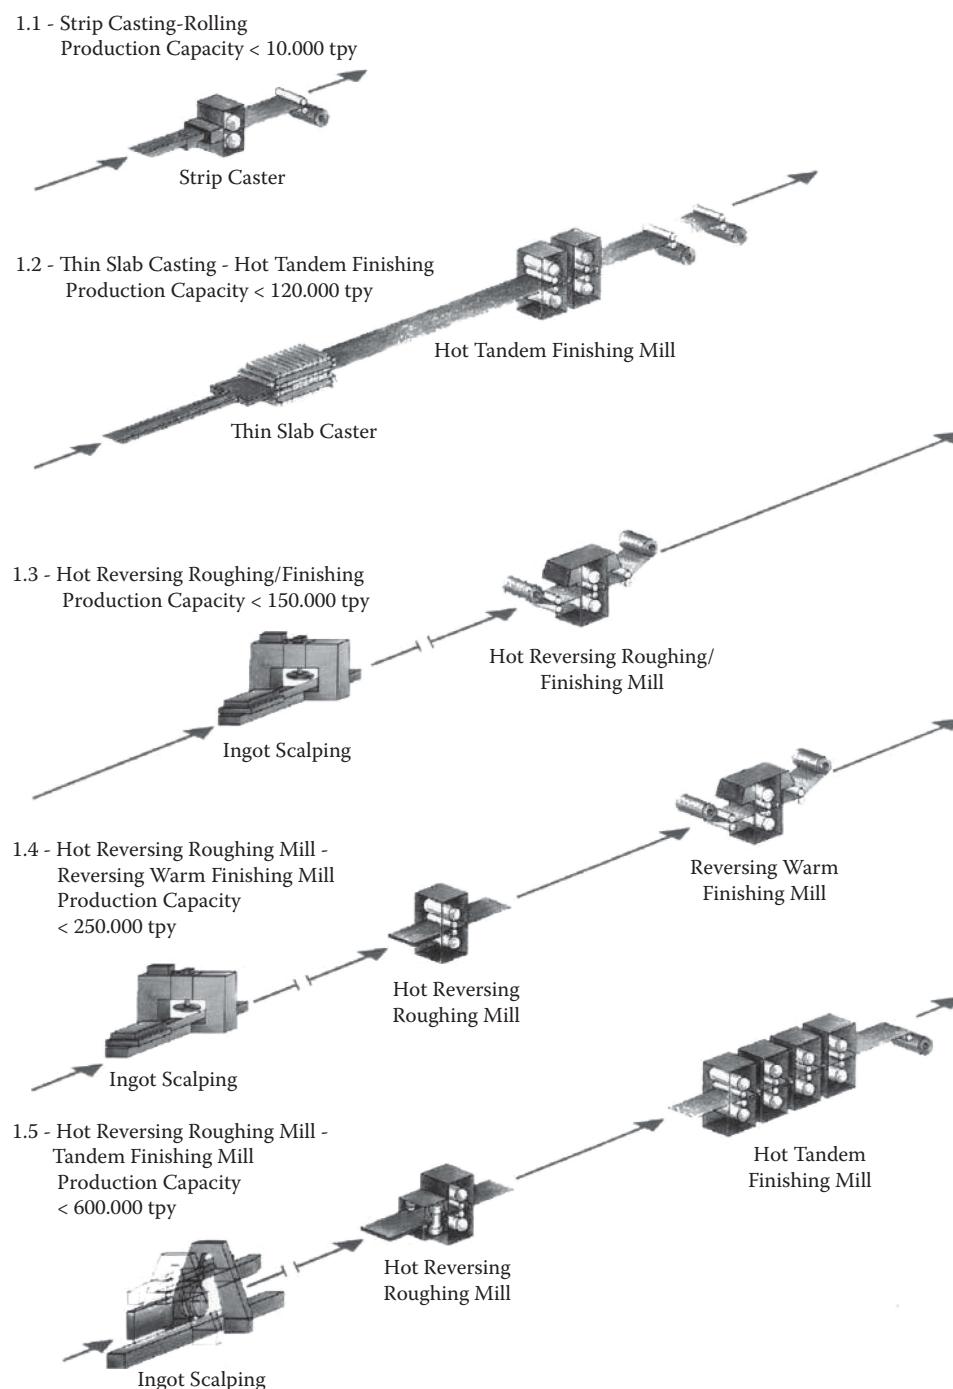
Hot strip casting and rolling mills for aluminum alloys^[5]
